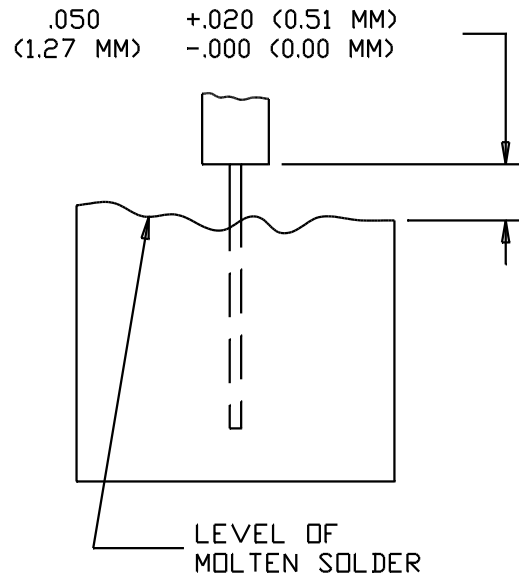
Example of axial wire-lead depth of immersion in molten solder.
